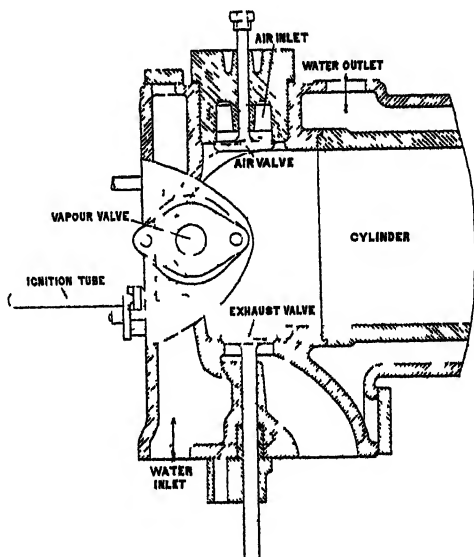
Vertical section through end of cylinder of the "Crossley" Oil-Engine (vaporiser removed).
